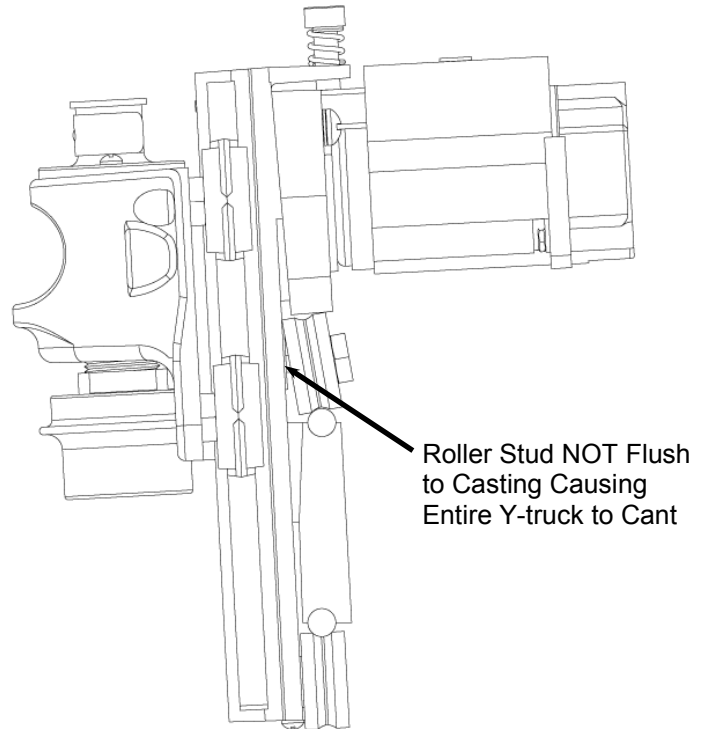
SIDE VIEW OF A IMPROPERLY INSTALLED Y-TRUCK (CANTED)
